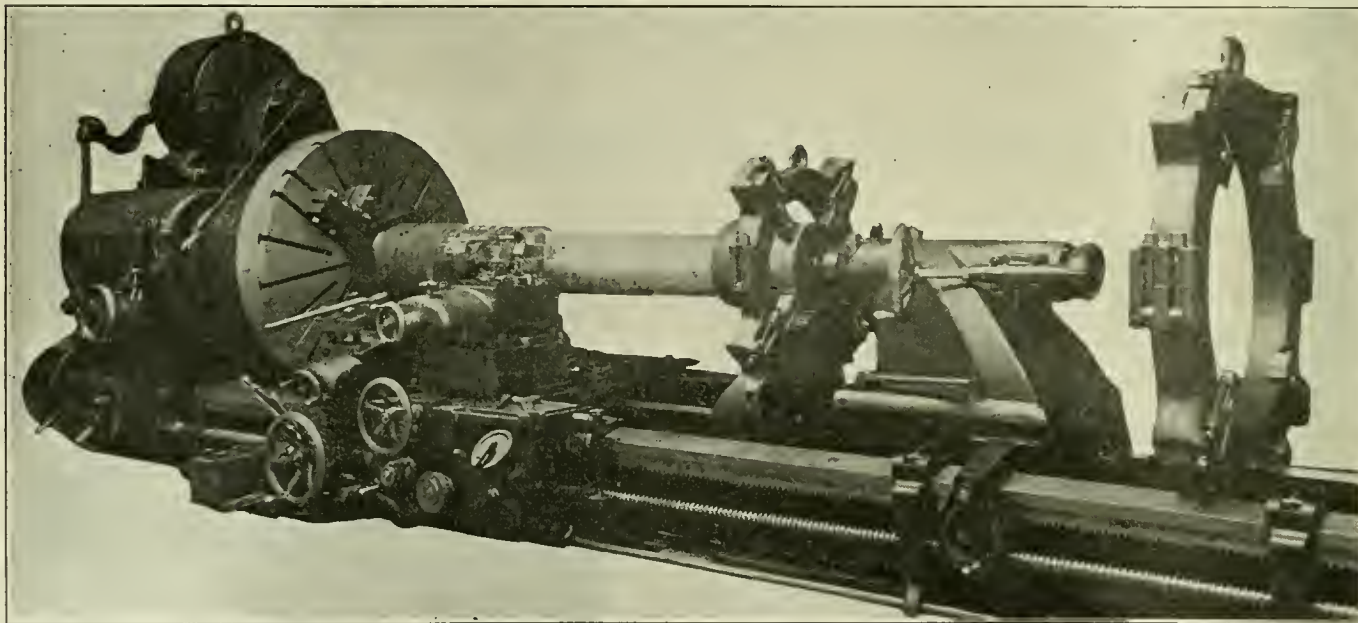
Houston, Stanwood and Gamble 60-In. Engine Lathe Designed for Heavy Duty
